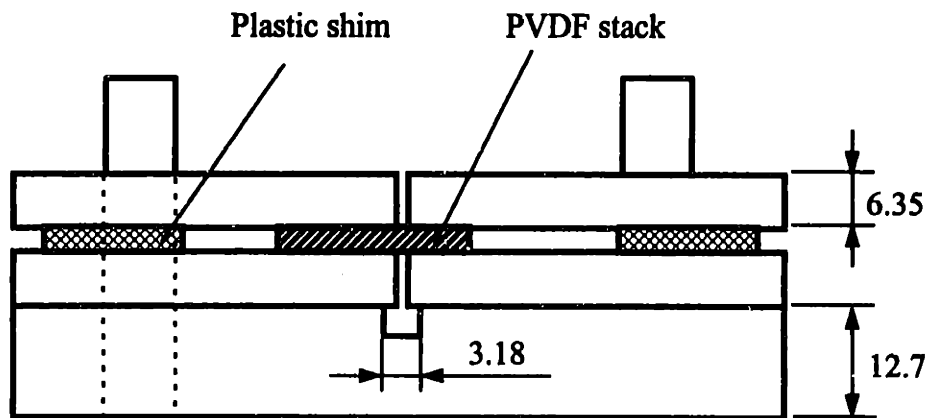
Auxiliary device for cutting the PVDF stacks. All dimensions in millimeters
